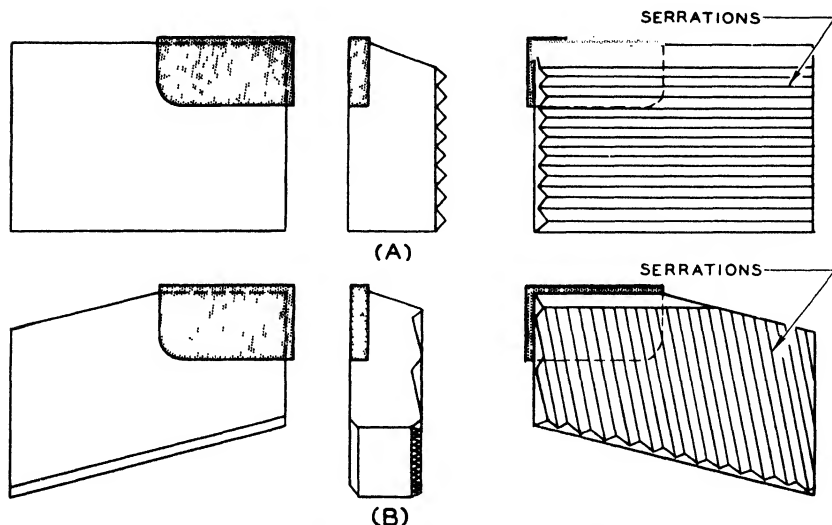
Straight-Type Blades for the Goddard Milling Cutter (A) and Blades for the Cone-Type Goddard Milling Cutter (B)
